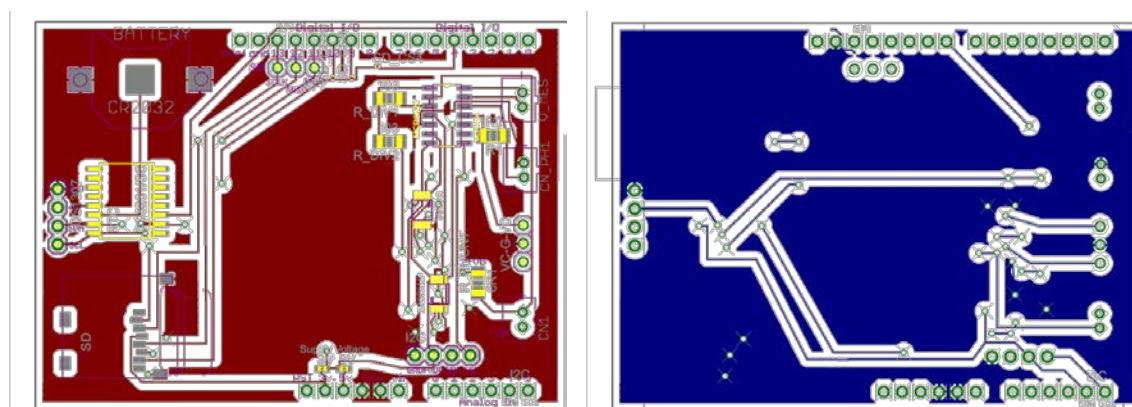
First generation measurement board. Left is the board top layer layout and right is the bottom side layout. The layout is based on an Arduino shield form factor (size 53x73 mm²). It contains a DAC circuit with a 4.096 V range and a 200 mA buffer amplifier for sourcing, while a 4 channel ADC with 18 bit resolution handles data collection.
